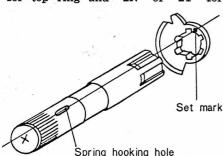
Mark on kickstarter gear should be aligned with spring hooking hole as shown.
